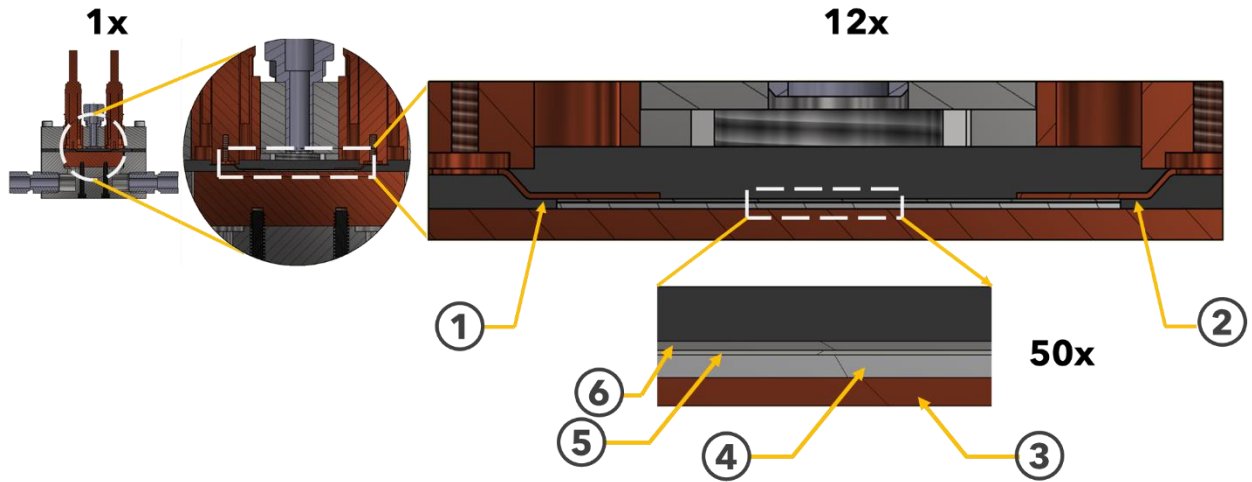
It has dimensions of 1.49, 3.34, and 0.70 in. for length, width, and height, respectively. On its top face, it has 18 bored-through holes on its perimeter to enable it to be bolted to the bottom block in a full assembly (Figure 0-1, 13). Additionally, the top block has a through hole on its top face located near its center of mass fitted with a Swagelok feed for the pyrometer (Figure 0-1, 5) and two adjacent through holes, each weld-fitted with an electric feedthrough (Figure 0-1, 4) that is externally connected to positive and negative lead wires carrying high amperage current. Copper brushes (Figure 0-2, 1. and 2.) are connected to the electrical feedthroughs on one end and to the sample holder on the other end, thereby completing the electrical circuit that enables pulse heating. The sample holder is made of a thin sheet (McMaster Carr, 1008-1010 steel foil, 0.007 in. thickness) and is resistively heated via electrical pulses, as described later. Finally, the top block has two slots for potential cartridge heaters slots on the front and back to heat the areas of the block that will be in contact with the carrier gas and evolved gases and decrease potential undesirable condensation on surfaces, if necessary (Figure 0-1, 6, and 7). The bottom block has identical length and width dimensions as the top block. However, it has a height of 1.49 in. to enable it to house a micro-channel cooling block on which rests the ceramic insulator, resistive heating element, and thin-film sample, as illustrated in Figure 0-2. The left and right sides of the bottom block have 3/8" fittings (Figure 0-1, 8, and 9) that serve as an inlet and outlet of the cooling fluid through the micro-channel cooling block if additional cooling is required. Like the top block, it has two slots for heating
